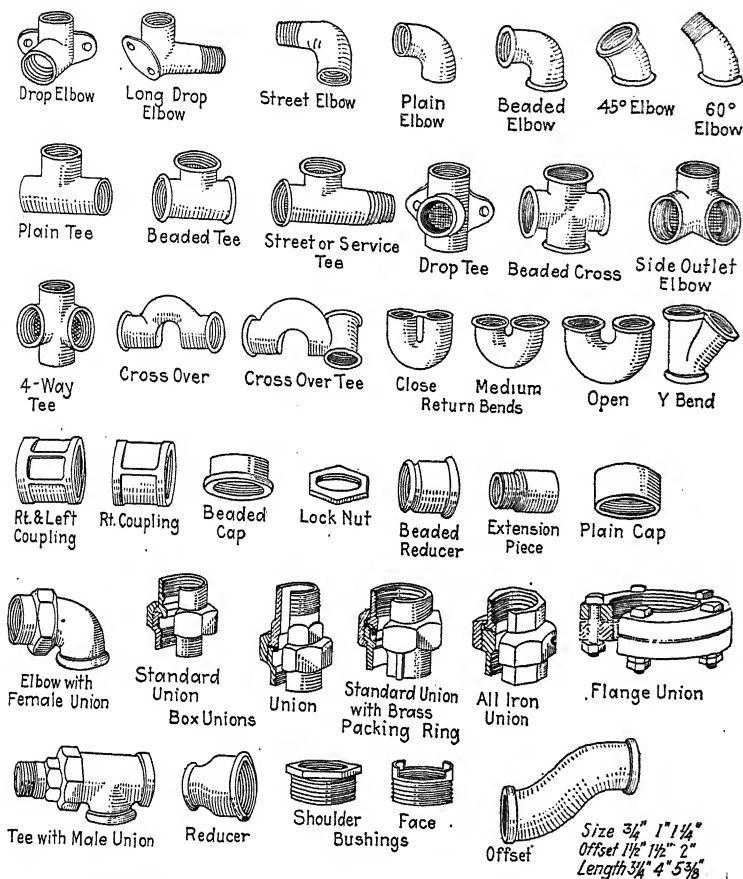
Malleable-iron fittings for threaded wrought pipe. Manufacturer's standard.
